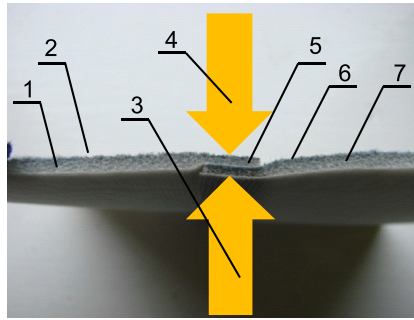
Physical conditions within seams bounded by a thermo-welding machine. 1 - fabric #1, 2 - semi-permeable waterproof layer, 3 - reference plane, seam support, prescribed temperature, 4 - head of a thermo-welding machine, prescribed temperature, 5 - glue activated from polyurethane tape + adhesion, 6 - fabric #2, 7 - semi-permeable waterproof layer.
